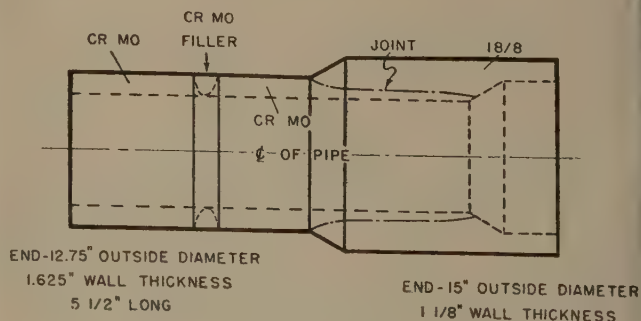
ARRANGEMENT OF KELCALOY TEST PIECE
